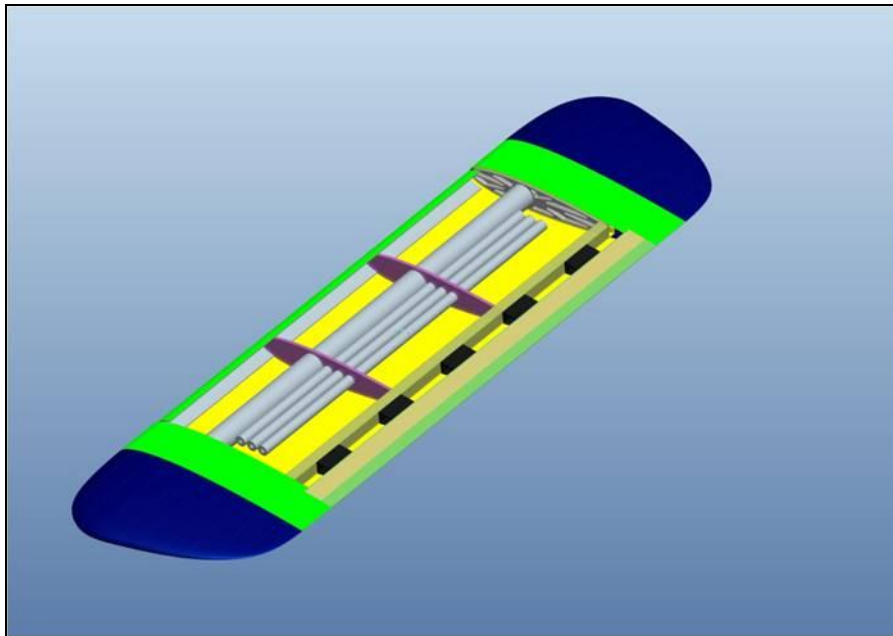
A CAD drawing of the 2m blade section to be mounted on the rotating test rig. The flap is attached on the right side of the blade section on the black connectors.
